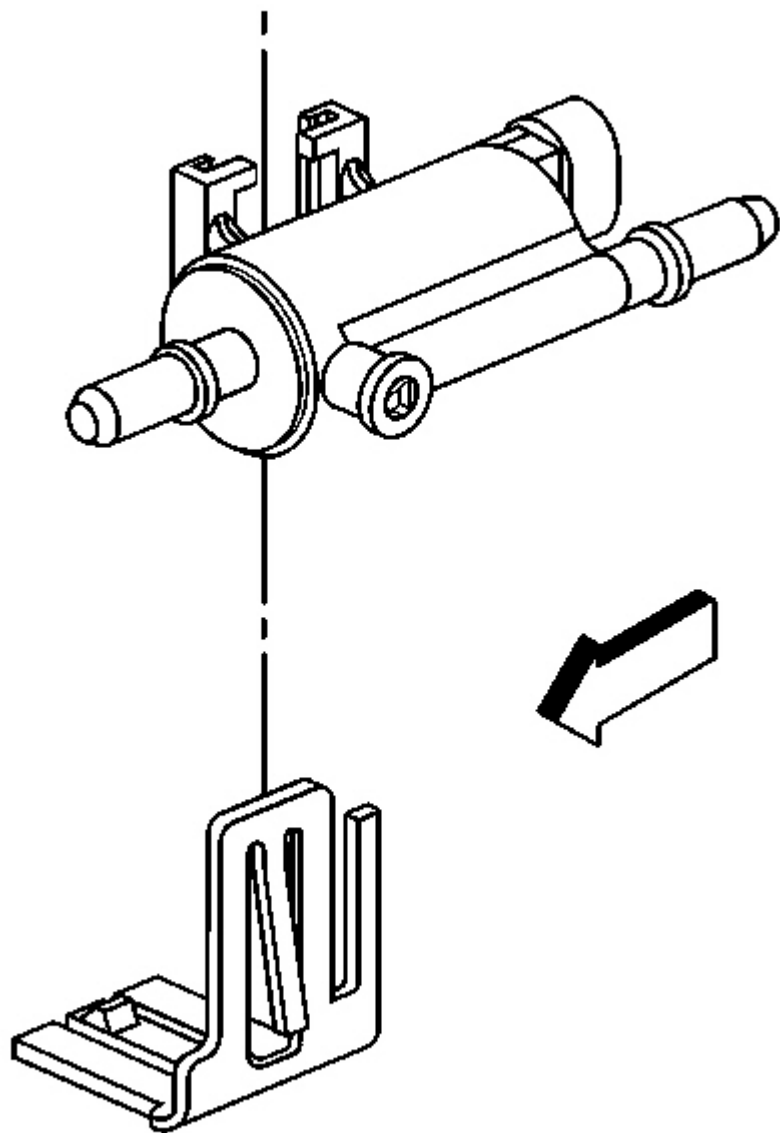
EVAP Canister Purge Solenoid Valve & Bracket
